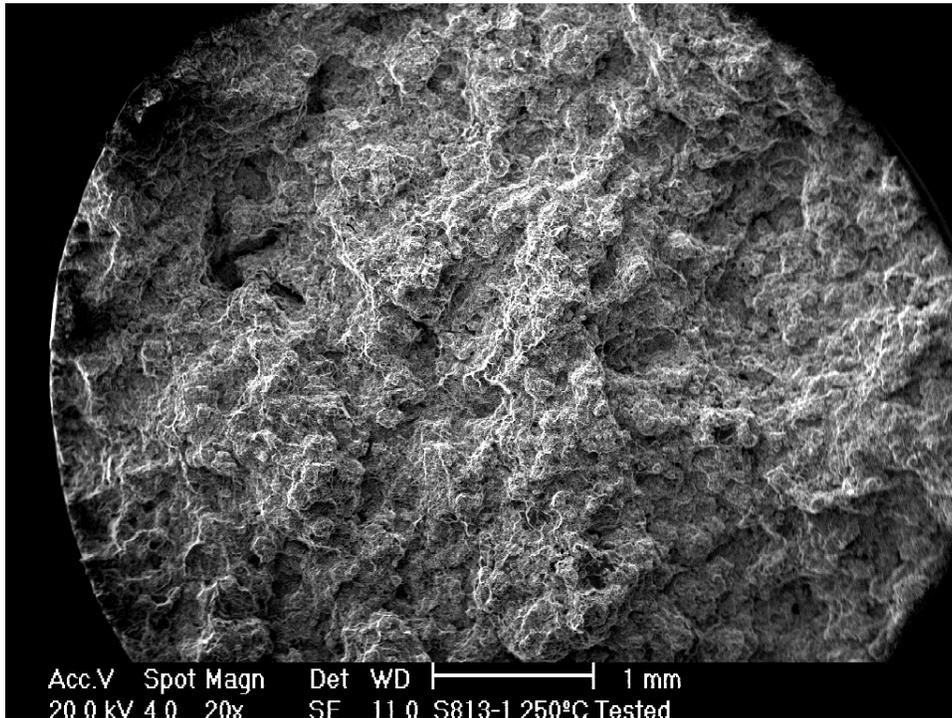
Fracture surface of S813 tensile tested at 250oC.
